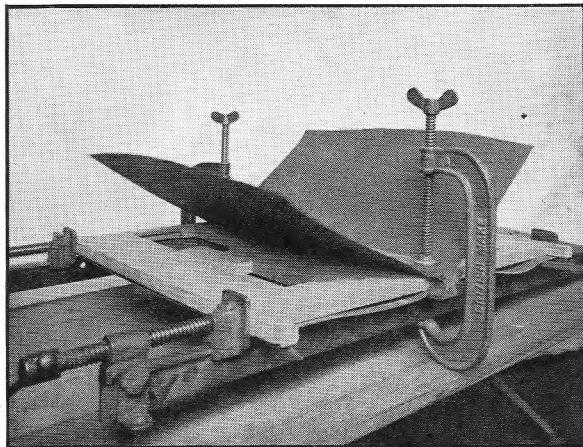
EARLY STAGE IN KEYSHELF MANUFACTURE.
